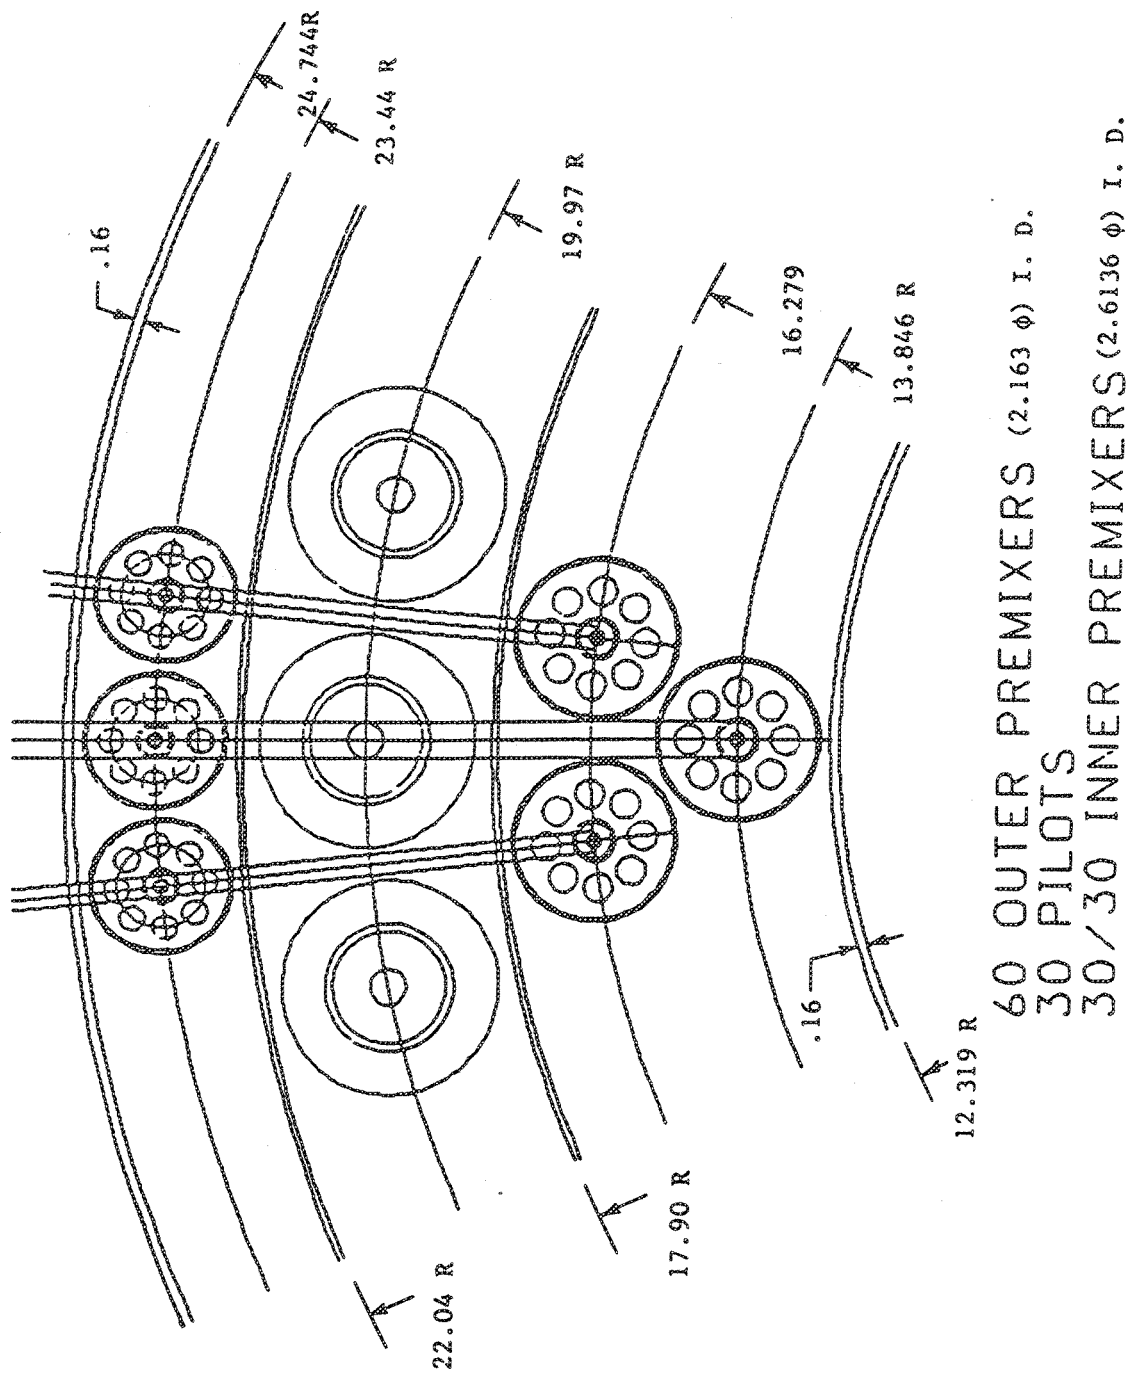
End View (ALF) of the Jet-Mix LDI Combustor Preliminary Design.
